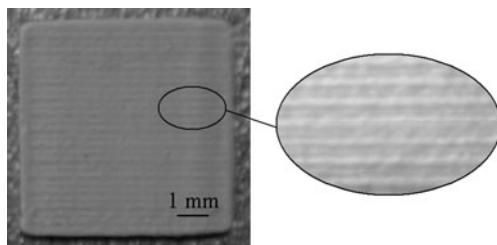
Specimen (10×10×1 mm) fabricated by the process of ceramic laser fusion
